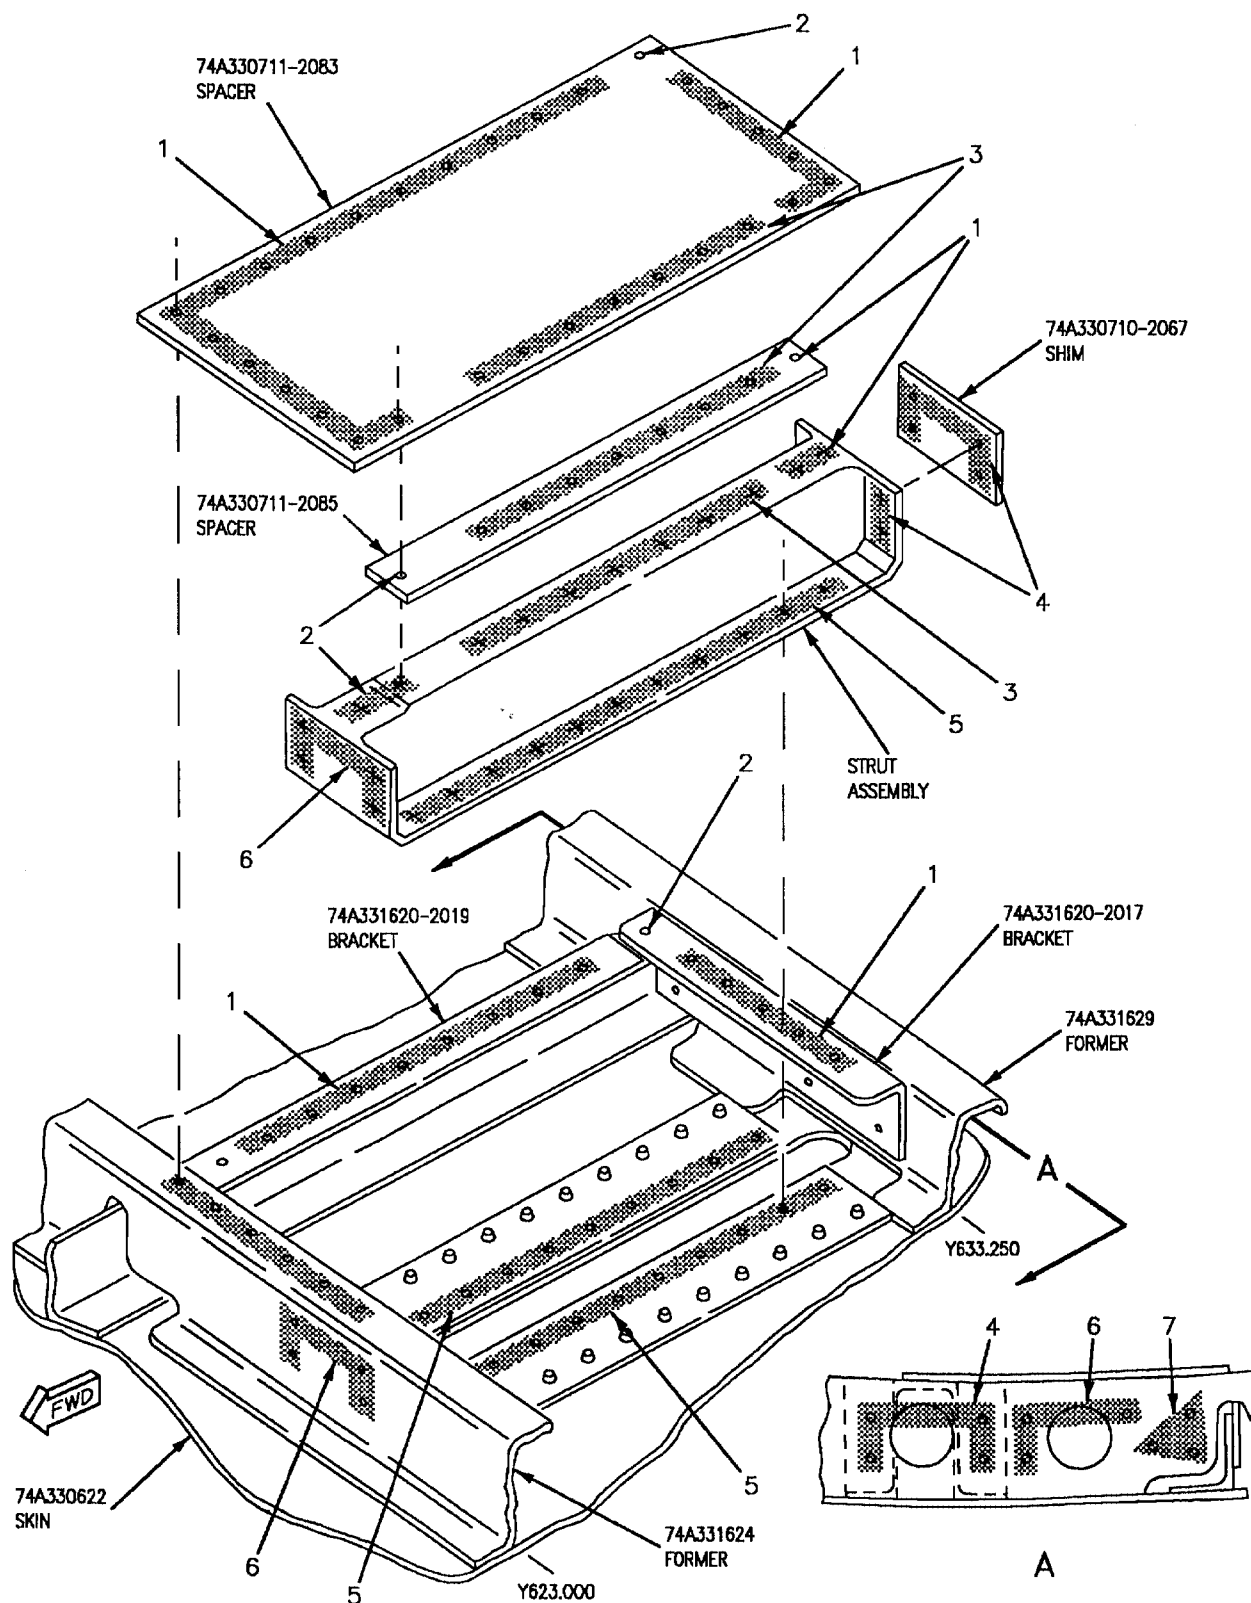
A2681-6, A2681-8 Strut Assembly Replacement (Sheet 1)
